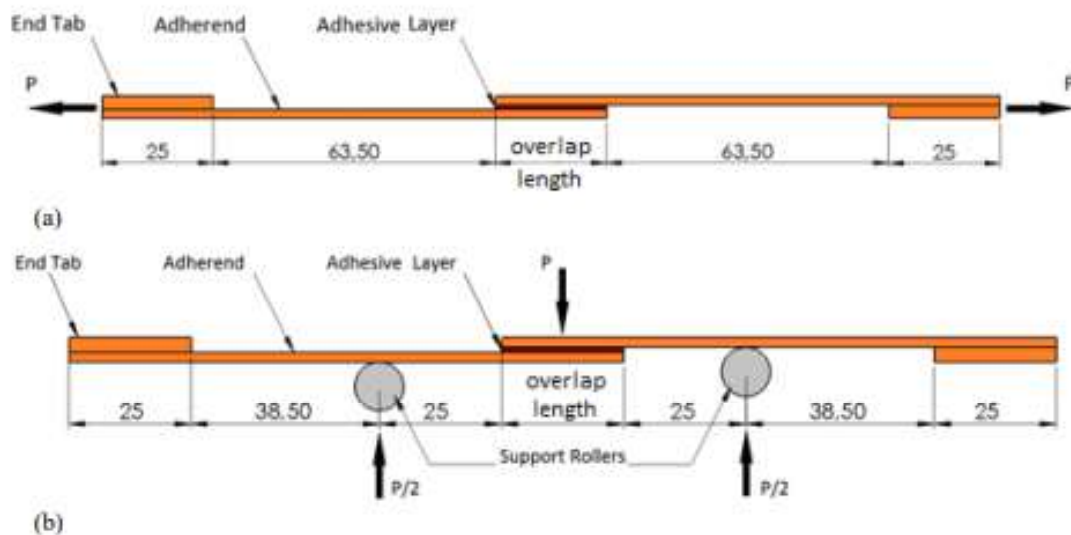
Geometrical details of the tested samples a) tensile b) bending
